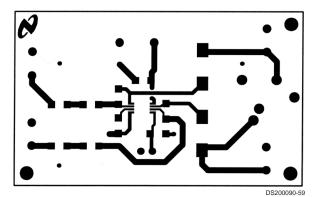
Recommended PC Board Layout Component-Side Layout
